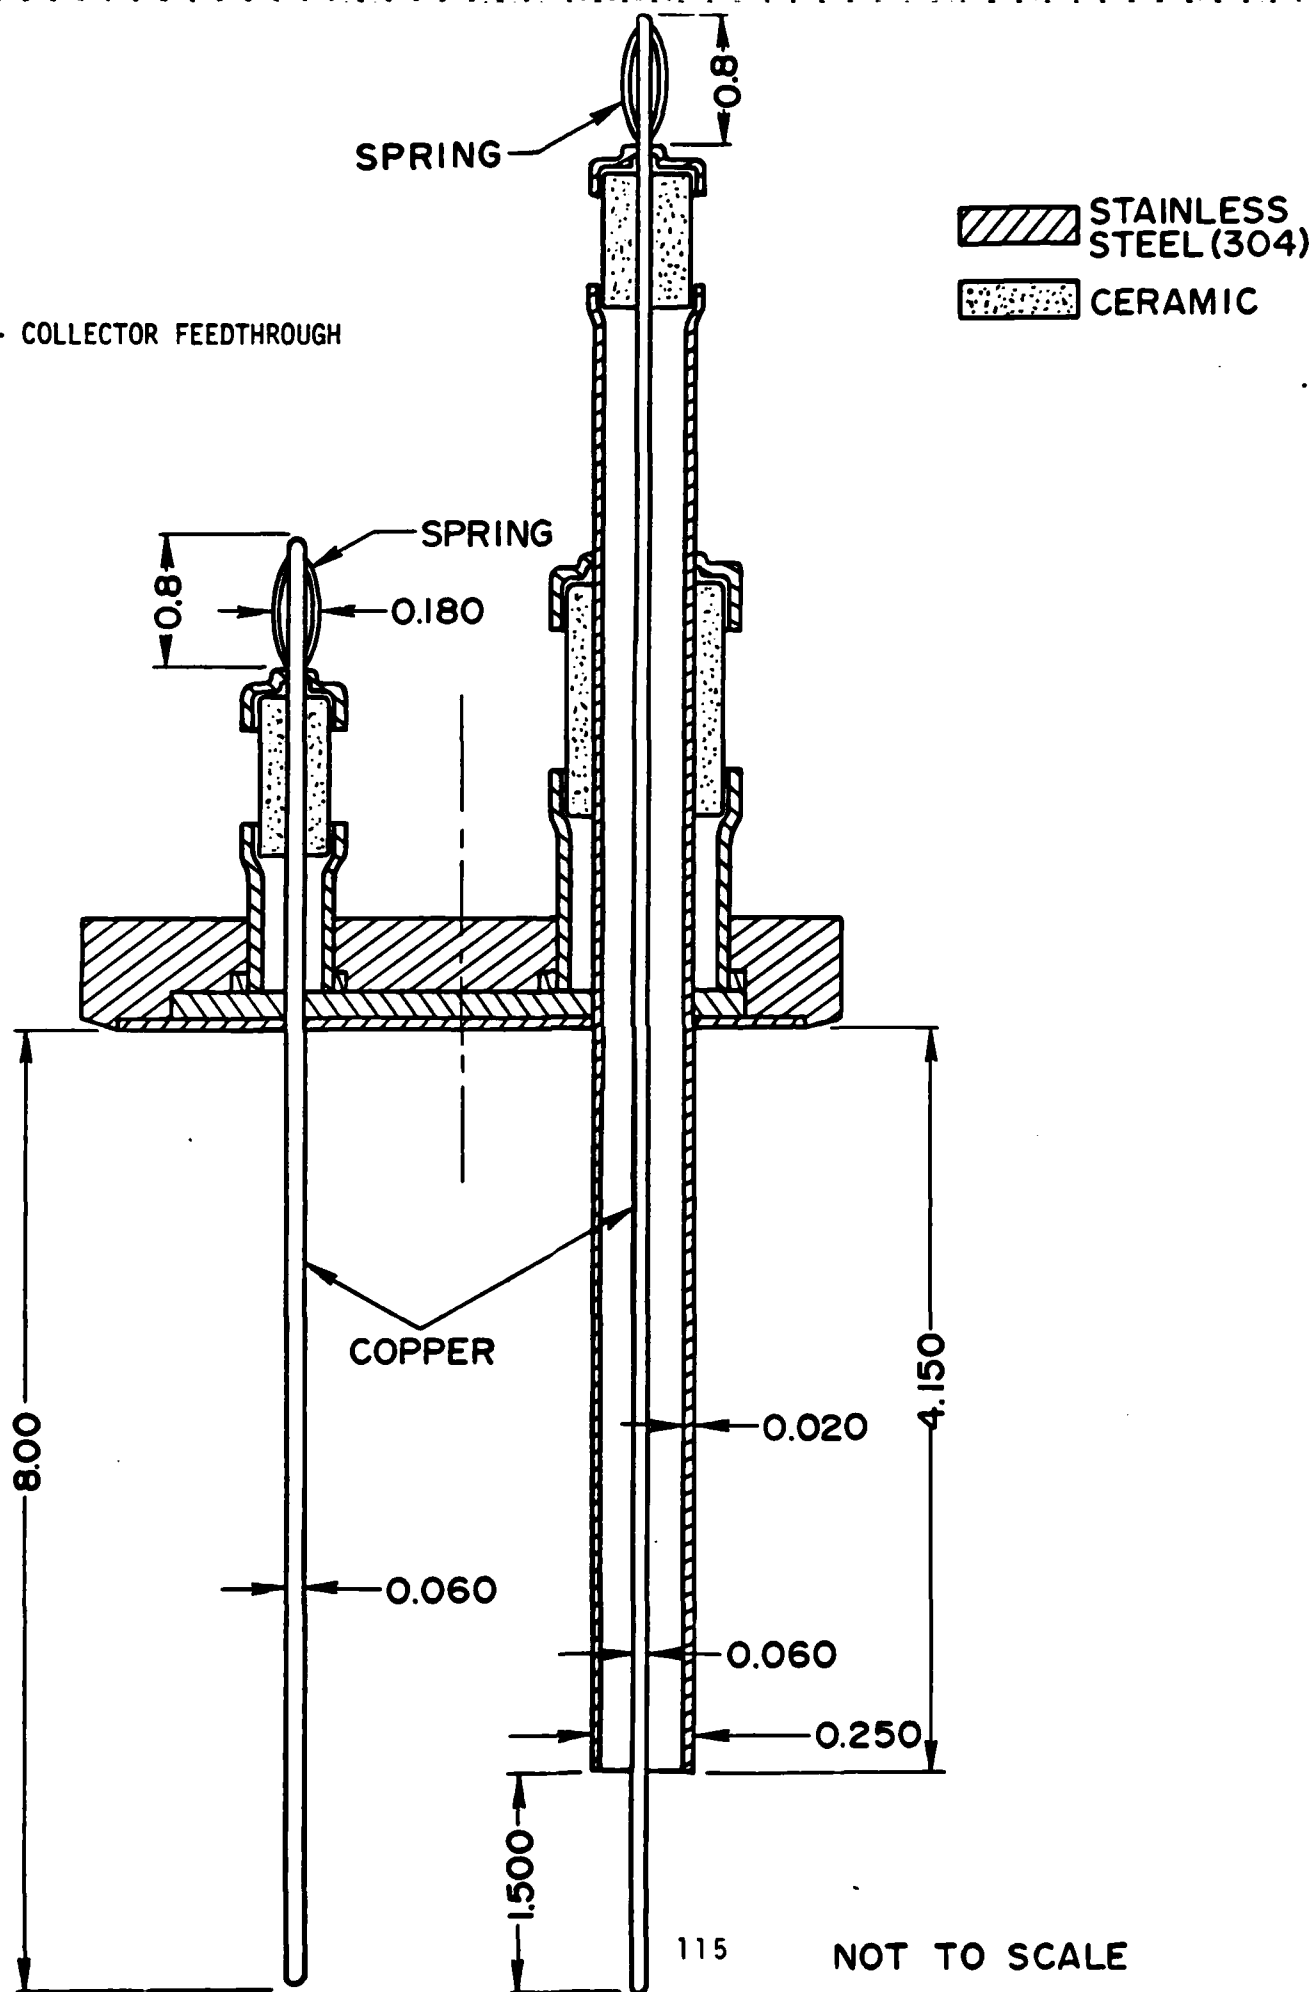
ASSEMBLY VIEW (COLLECTOR)
